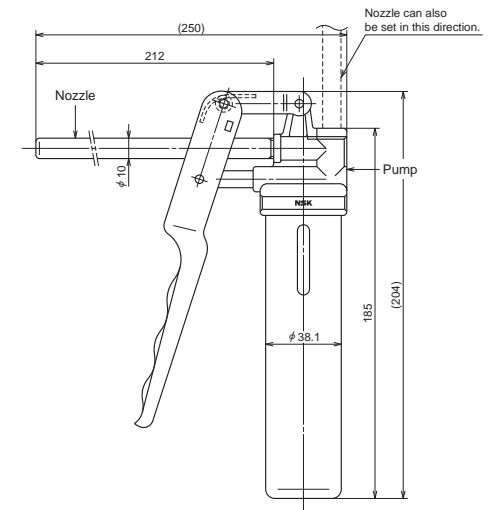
NSK Hand Grease Pump with NSK straight nozzle
